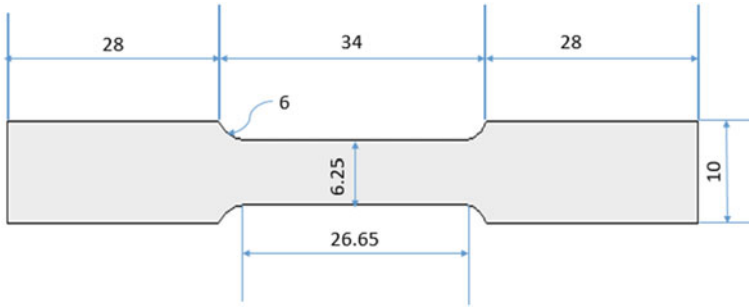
Dimensions of tensile specimen used in the present study (All dimensions are in mm)
